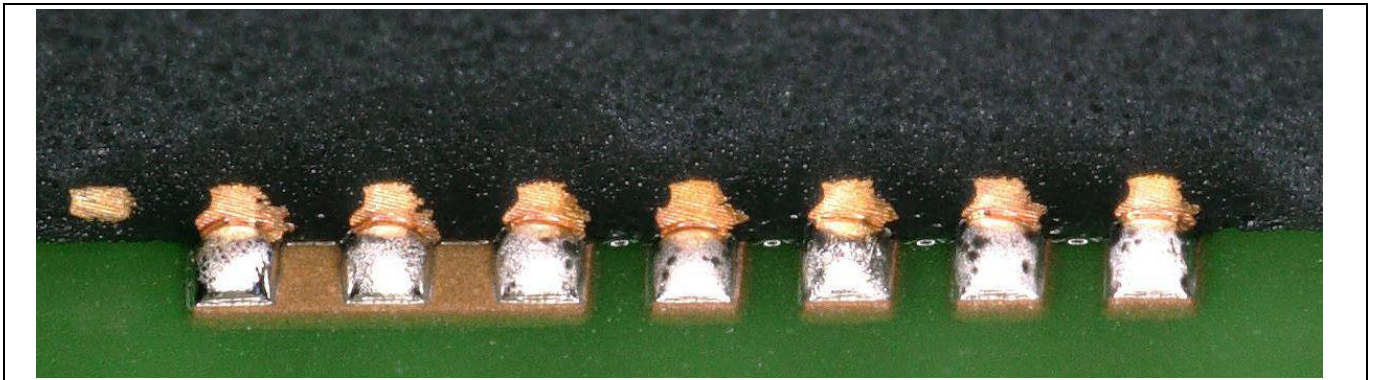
Photograph of a soldered IQFN package on SMD PCB pads.
